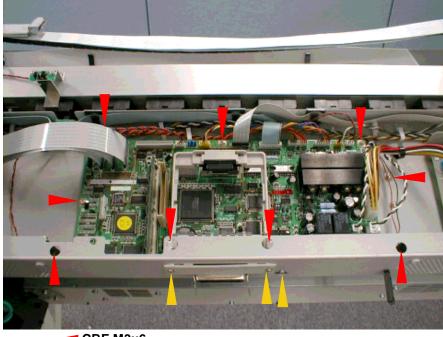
Power Supply Board Removal (viewed from in back of printer)
